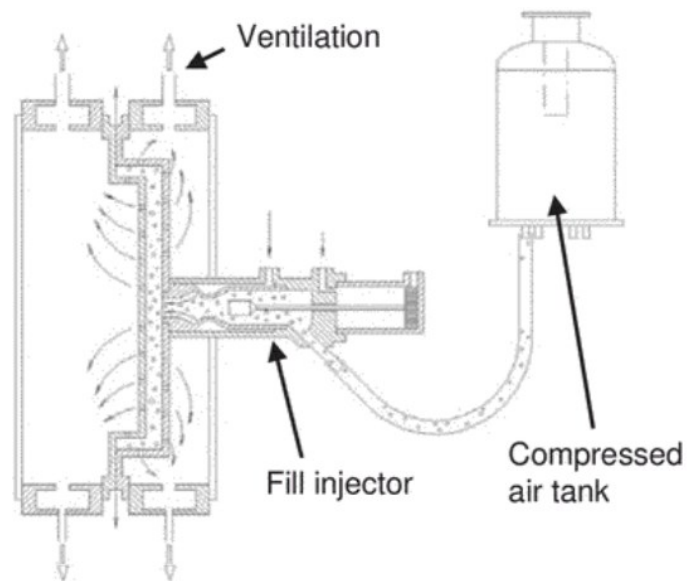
Schema of the mold with filling injector and pressure filling container [28]
